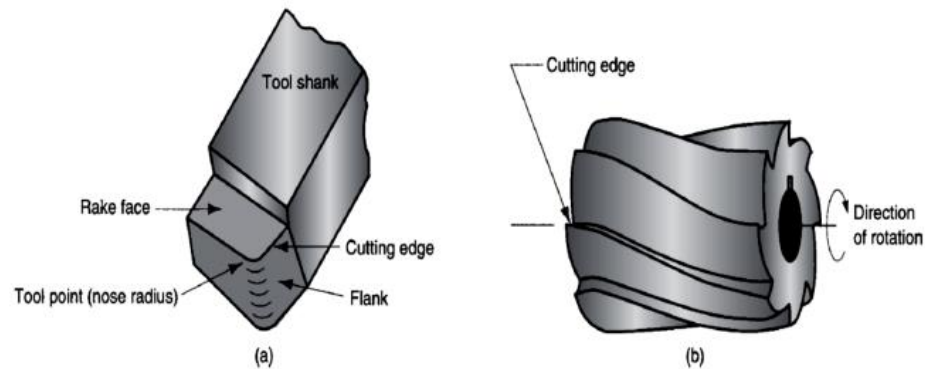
(a) a single-point tool, (b) a helical milling cutter (multiple cutting edge tool)
